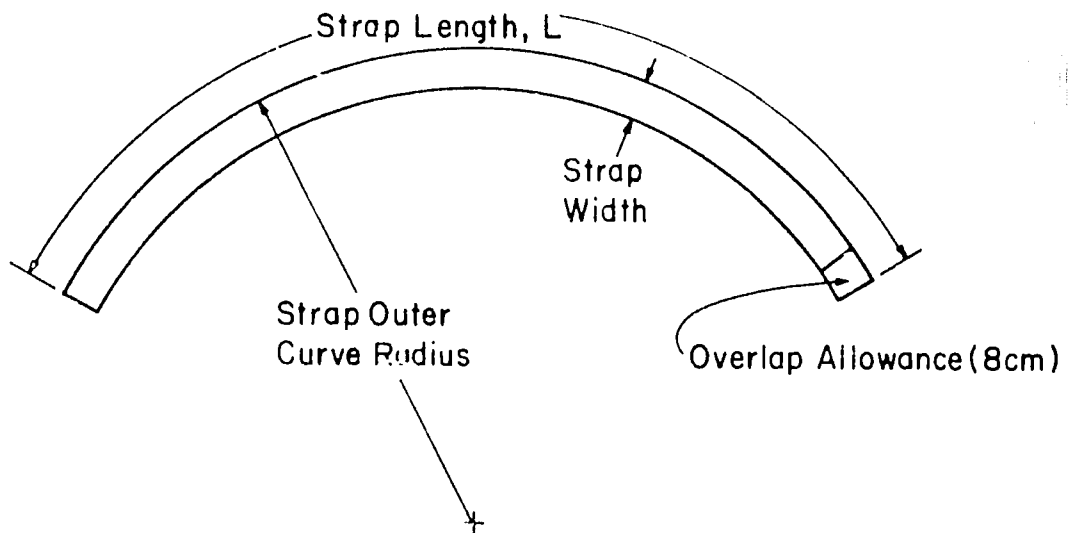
Definition sketch for sheet metal strap used to make the separator ring.
